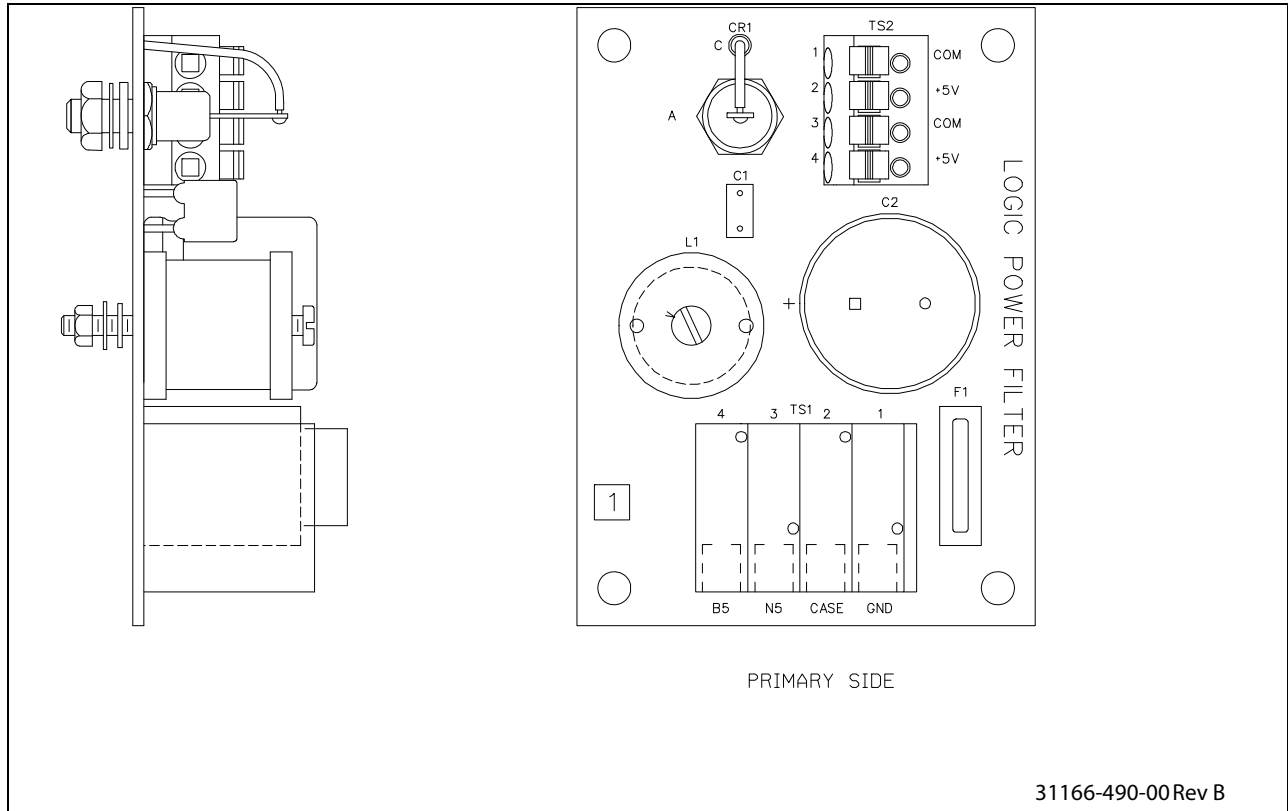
Filter Board, 5V, P/N 31166-490-01
